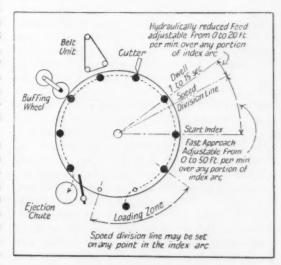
At successive positions on this ten-station indexing table, a heavy peripheral flash is removed with a turning tool, and the parts are polished and buffed.
